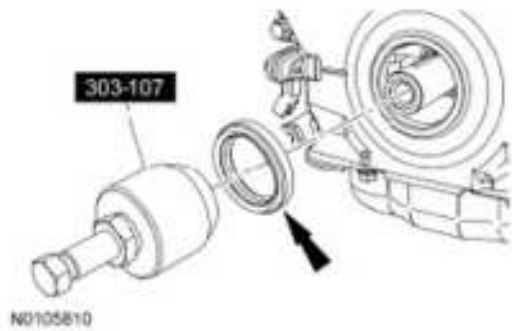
Locating Crankshaft Front Seal And Crankshaft Front Oil Seal Remover
